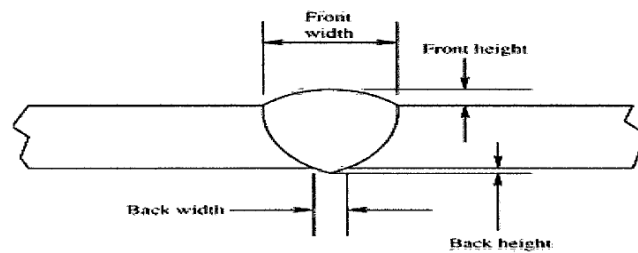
Schematic Diagram Showing the Weld Bead Geometric Parameters
